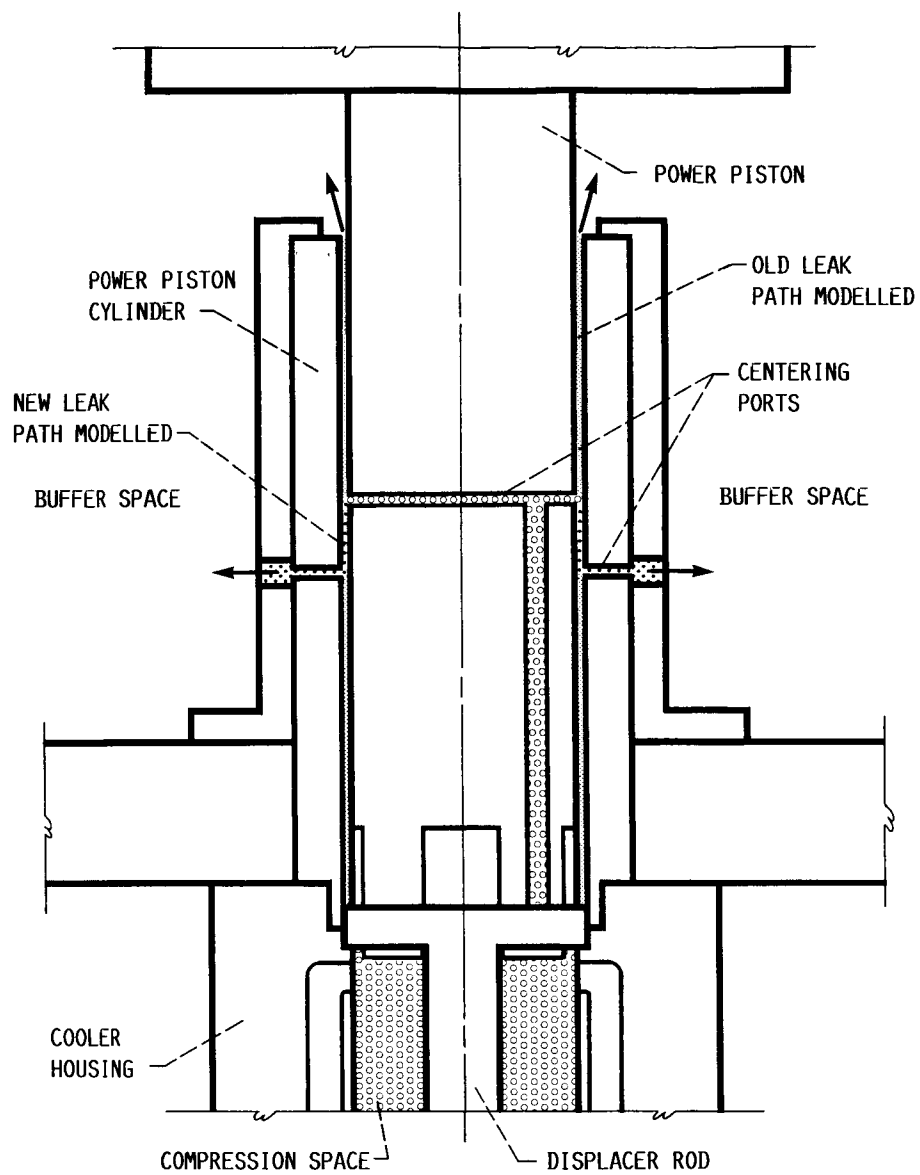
POWER PISTON LEAK PATH OF RE-1000 ENGINE.
